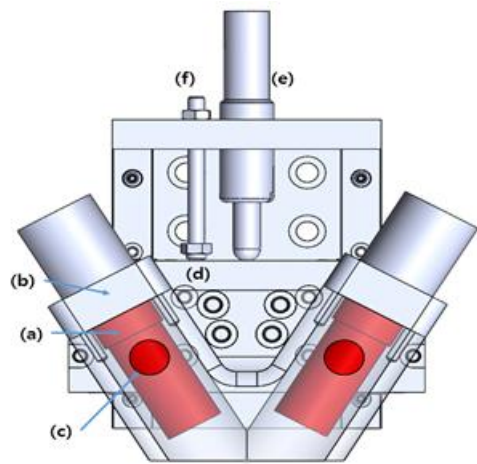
UT inspection module; (a) transducer, (b) wedge, (c) water support port, (d) wedge jig, (e) ball plunger and (f) stopper
